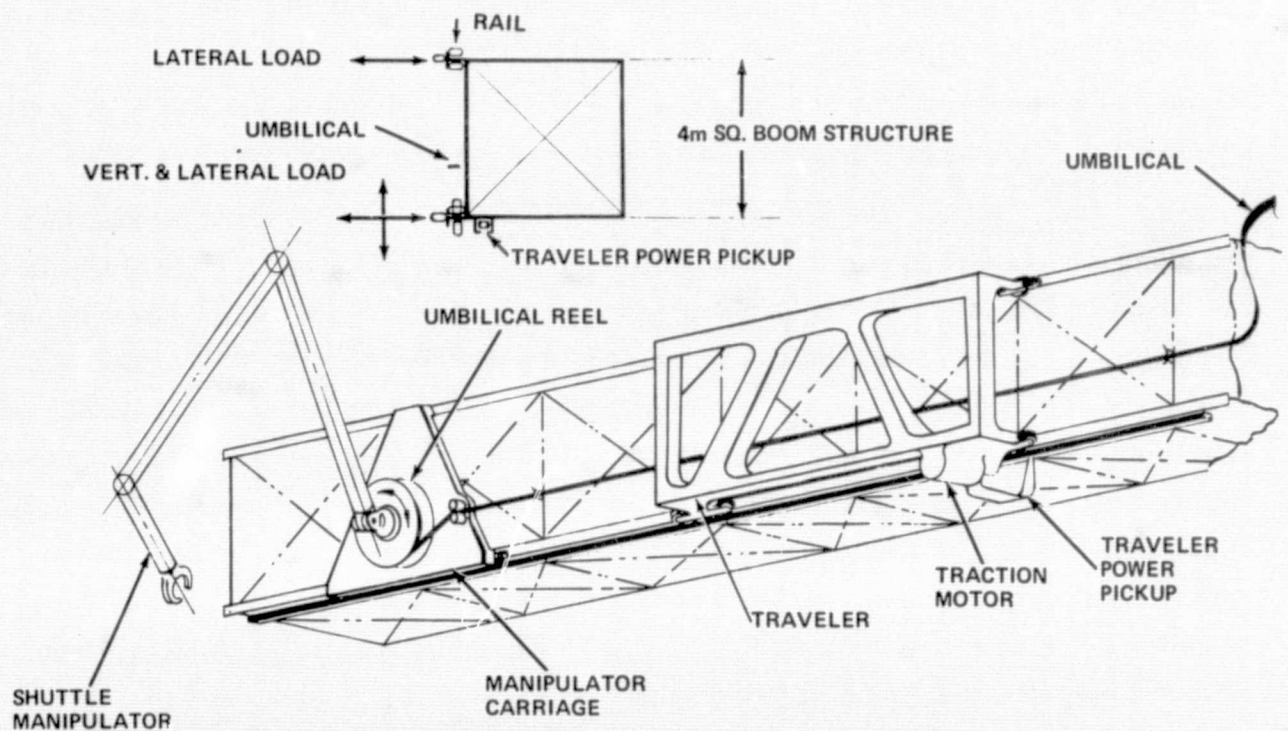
OCDA Rotating Boom Manipulator and Traveler
